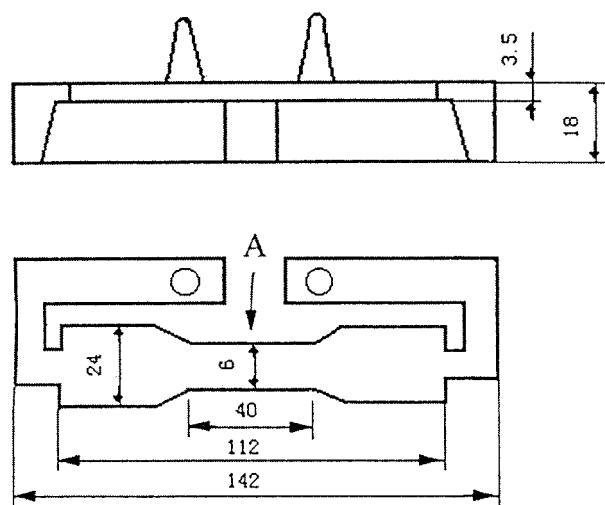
The sketch of mechanical test specimen dimensions according to the ASTM638 M standard.
